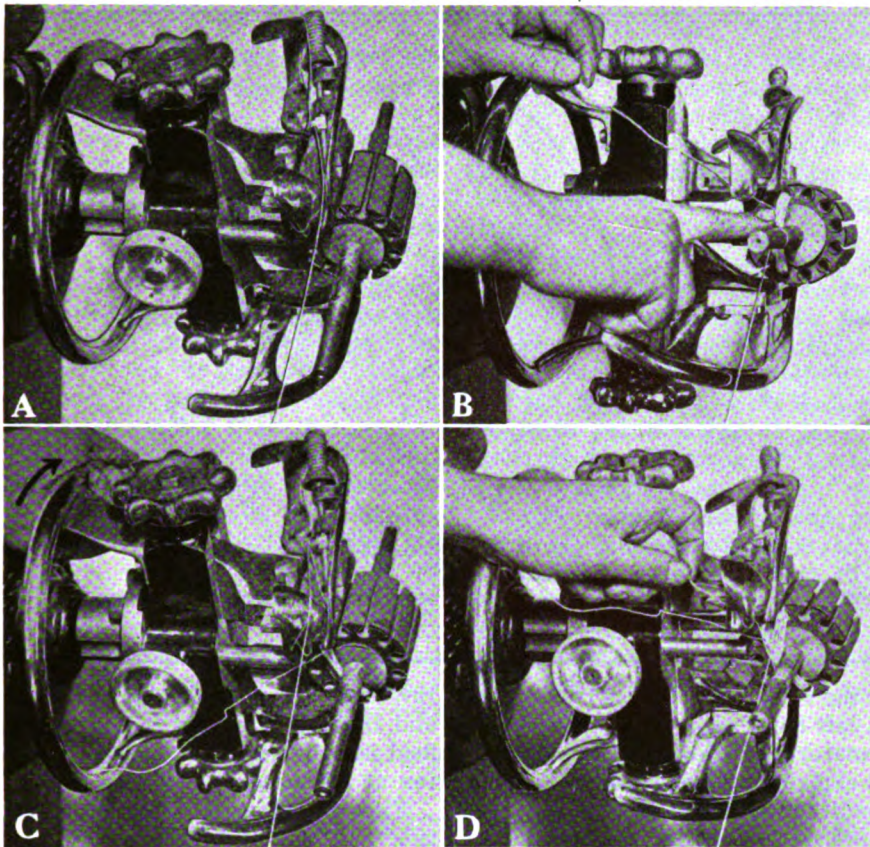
Four stages in making loop winding with right-hand coils on Chapman winding machine.
